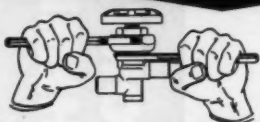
Shows wrenches properly applied to main body and auxiliary body for breaking the joint; the first step in disassembling the valve.
